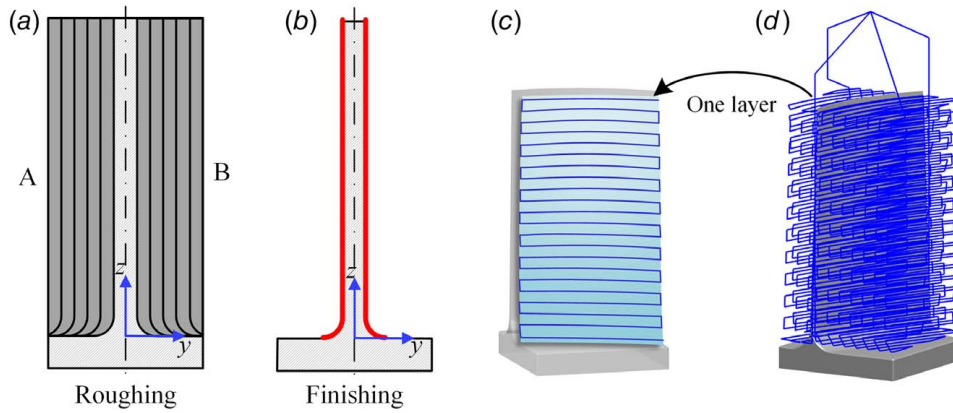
Machining of the blade by the benchmarking method: (a) the sliced parallel MLs (cross-sectional view), (b) the finishing layer (cross-sectional view), (c) the iso-planar toolpath on one ML of (a), and (d) the entire toolpath of both roughing and finishing stage
